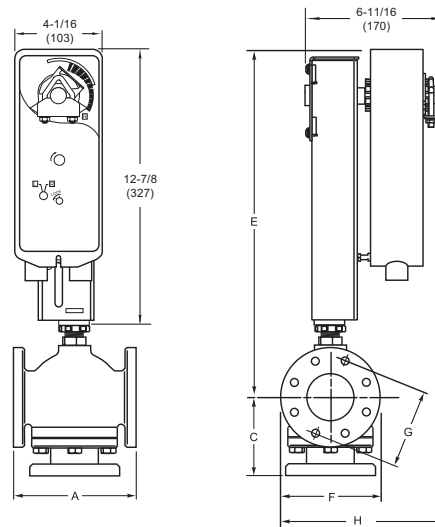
Mx41-715x with 6" Flanged 3-Way Globe Valves.
